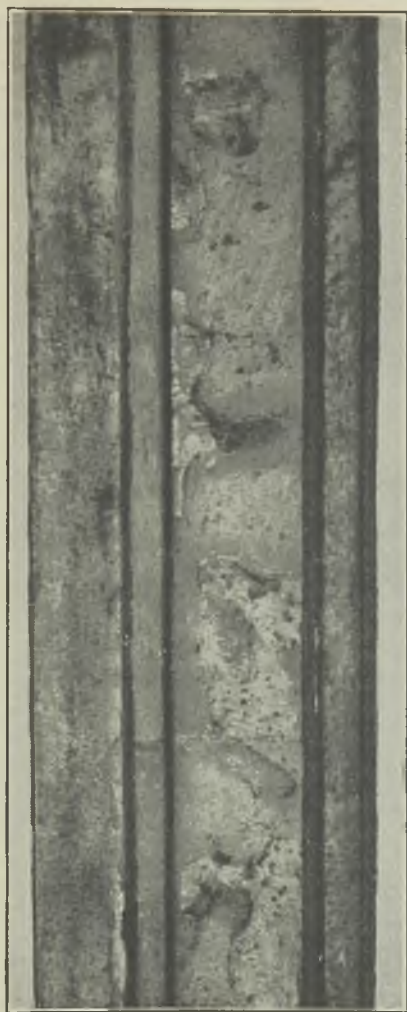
TYPICAL DEFECTS DUE TO SAND BUCKLES FROM CORE ON LONG GROOVE CASTING.
